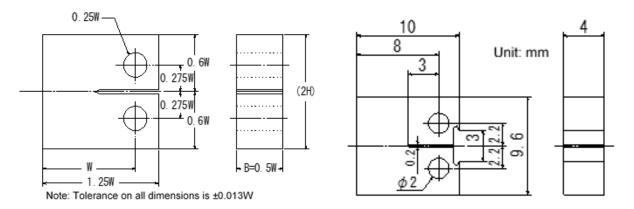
Geometry and dimensions of C(T) specimen in ASTM E1921[1].
